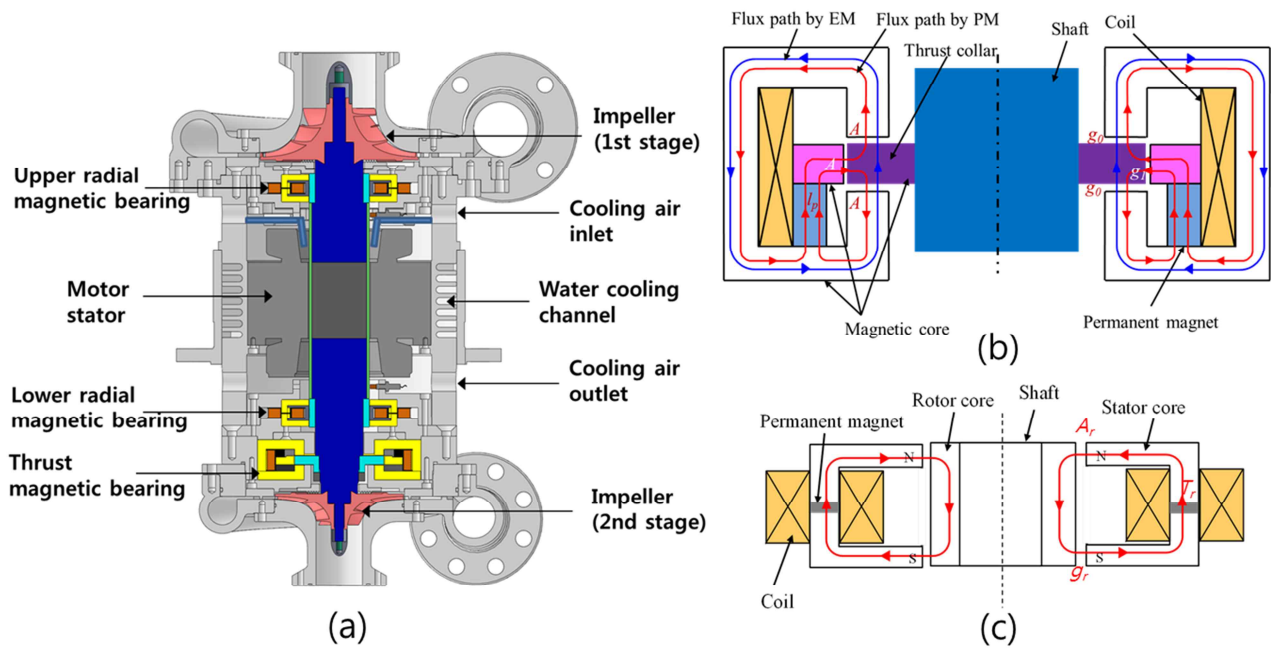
Configuration of 300-HP-class turbo compressor and hybrid magnetic bearings
